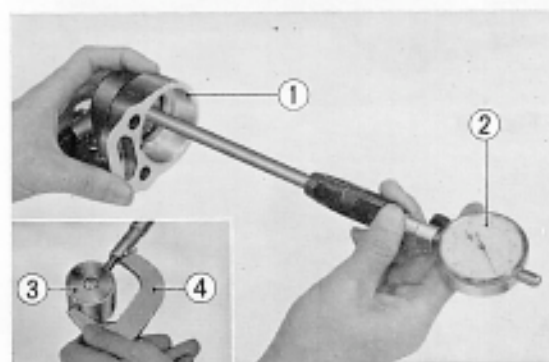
① Caliper cylinder ② Cylinder gauge ③ Piston ④ Micrometer
